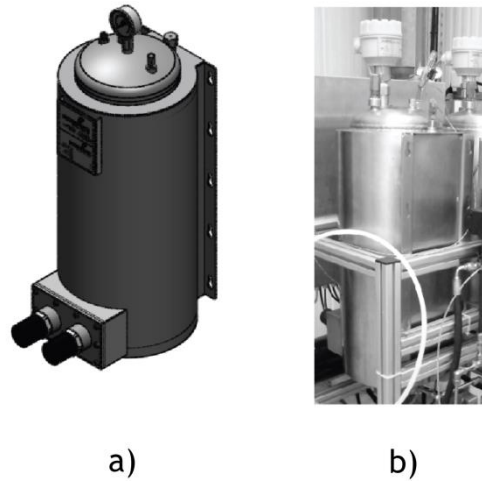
Storage tank from CDRsp Equipment: a) CAD project b) storage tank photography
